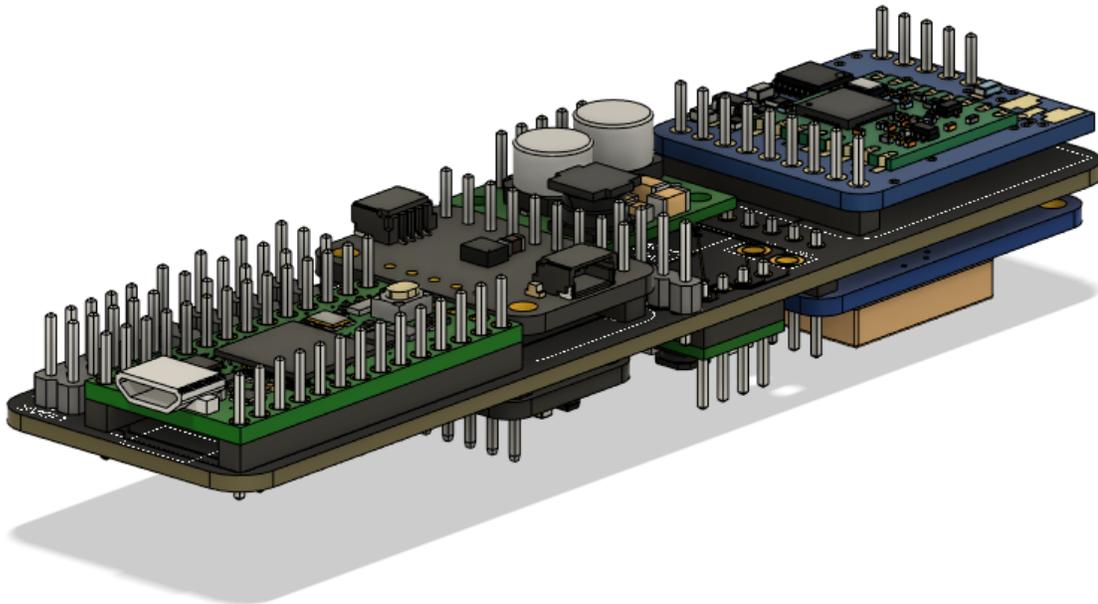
UAV PCB 3D Board (Isometric View)
